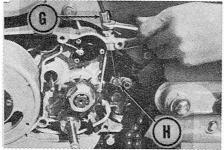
With the throttle at full open, turn cable guide (G) until hole (H) in lever is aligned with mark on pump body.
